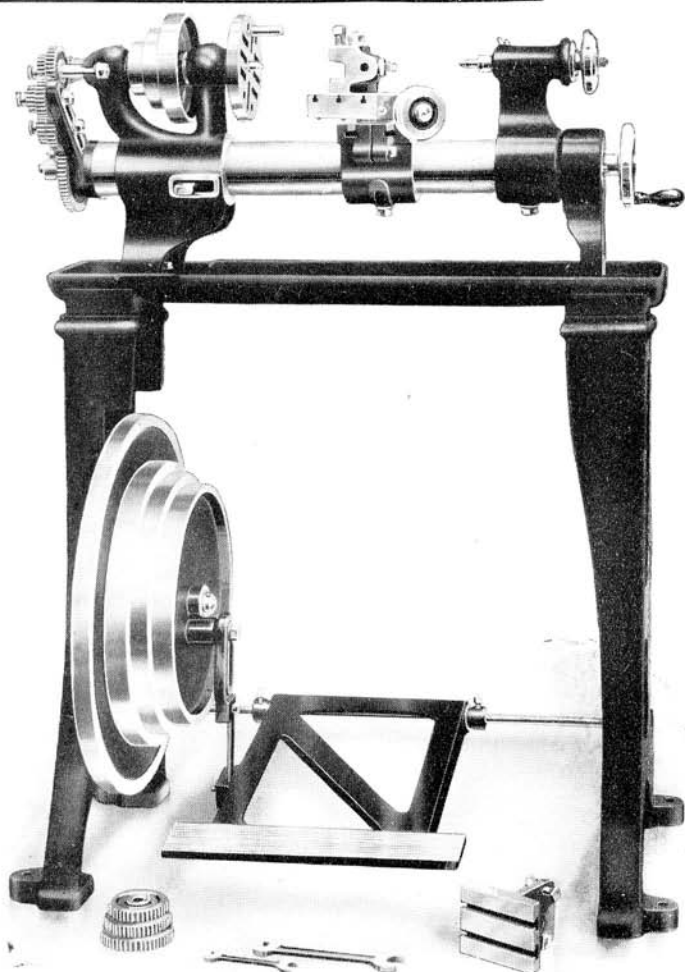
4-in. Lathe, complete on Stand, with treadle drive.
